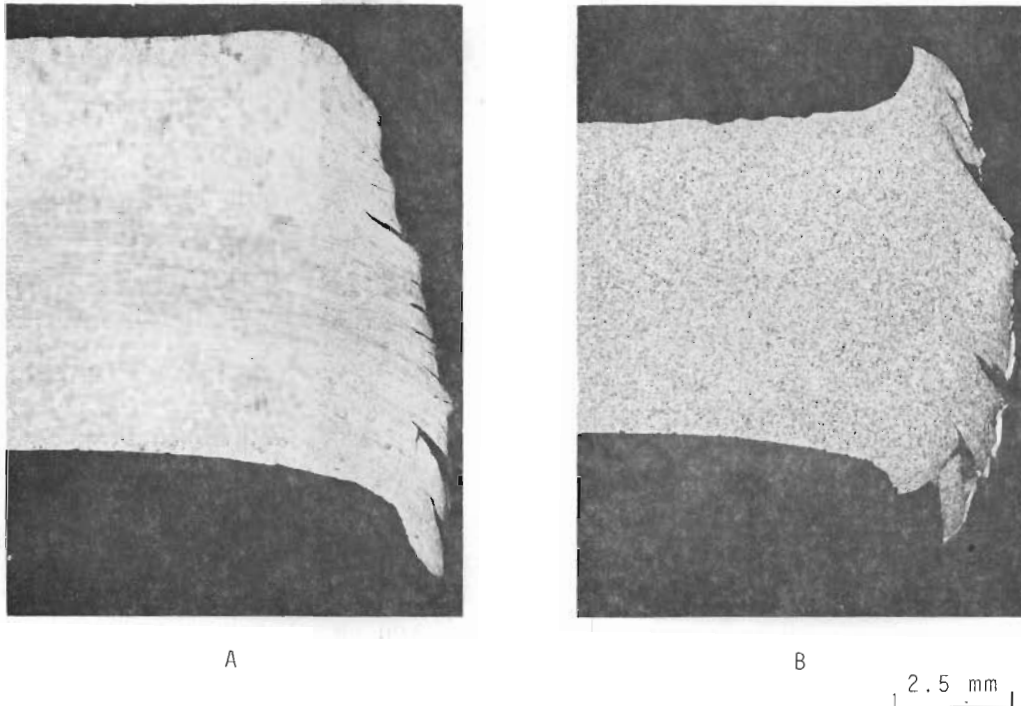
Optical Micrographs Illustrating the Type of Surface Produced by Explosive Cutting: A) 0.8-cm Thick Stainless Steel Pipe Cut from the Inside and B) 0.6-cm Thick Mild Steel Pipe Cut from the Outside.
